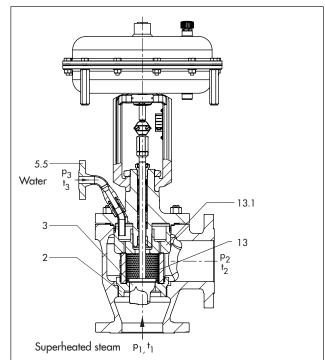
Type 3286-1 Pneumatic Steam Converter with flanged connections and Type 3271 Actuator
